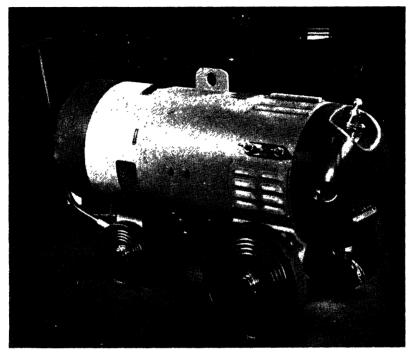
A portable D.C. arc welder (Courtesy of: Westinghouse Electric and Mfg. Company)
